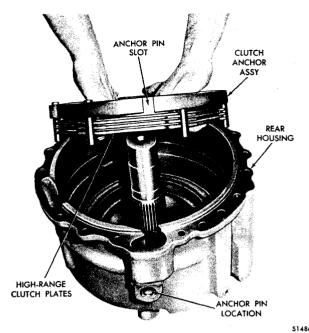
Installing assembled high-range clutch (-3 overdrive model)
